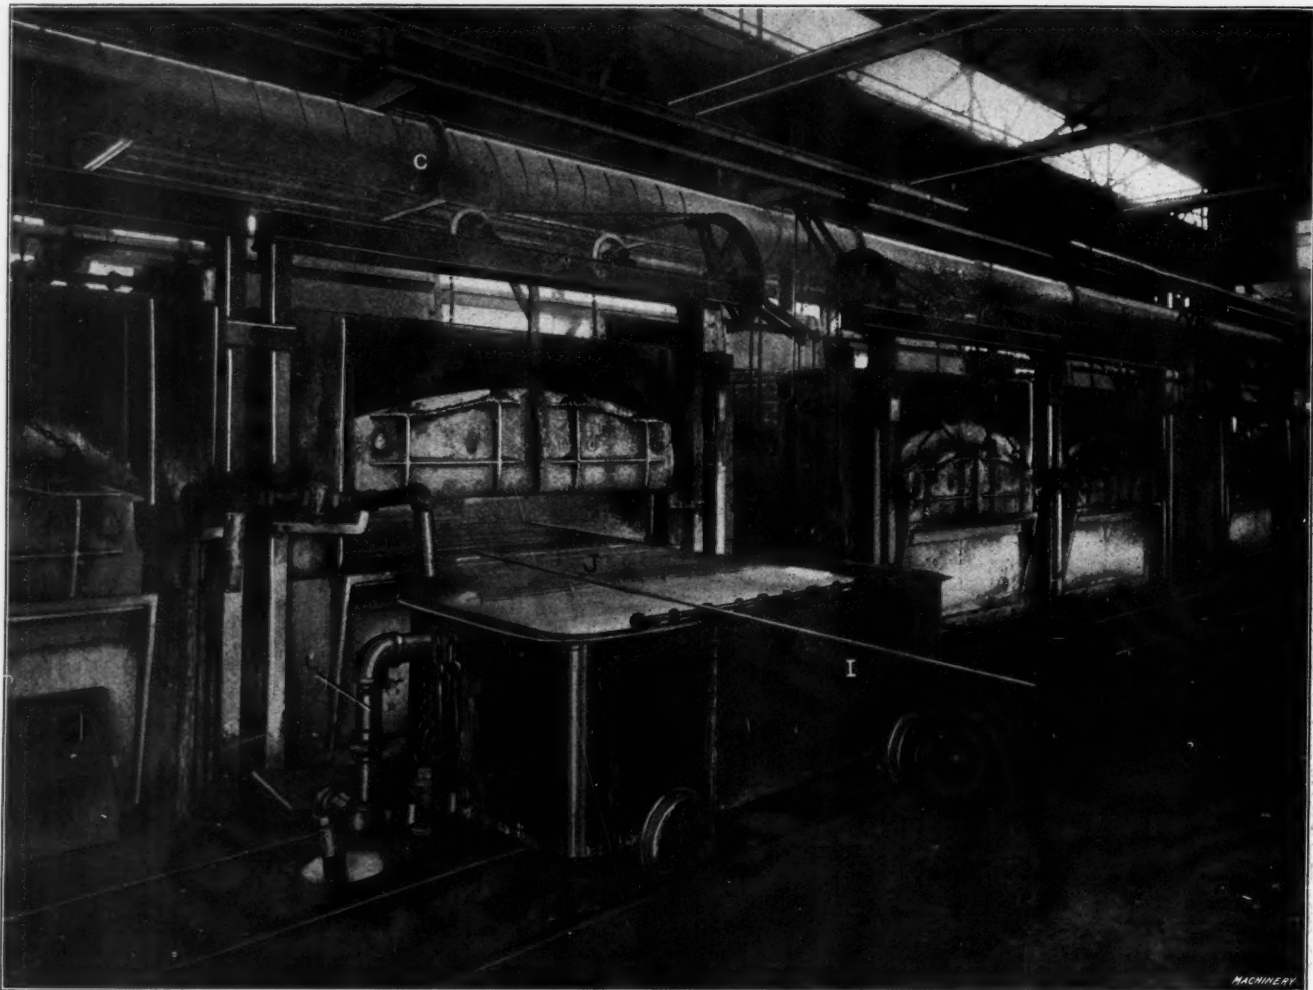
Oil Quenching Tank ready for receiving Automobile Drive Shafts from the Furnace
